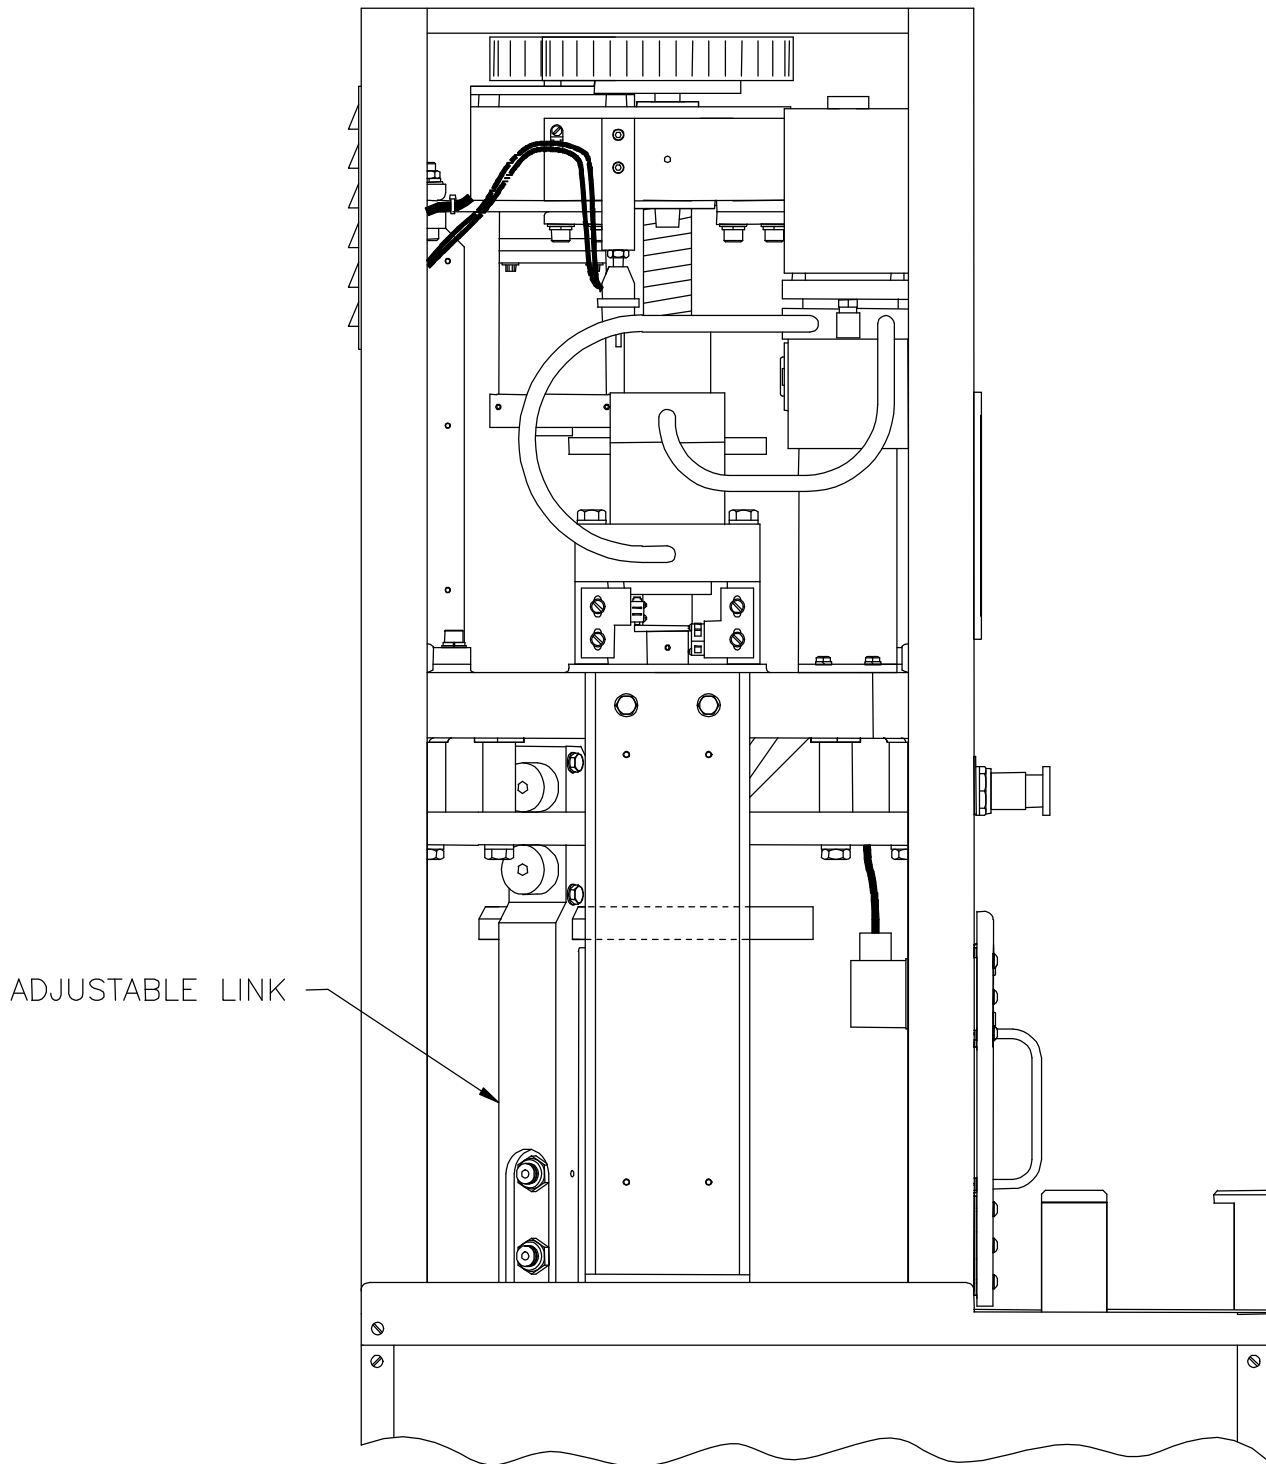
CARRIAGE POSITION FOR ANGLE ADJUSTMENT
